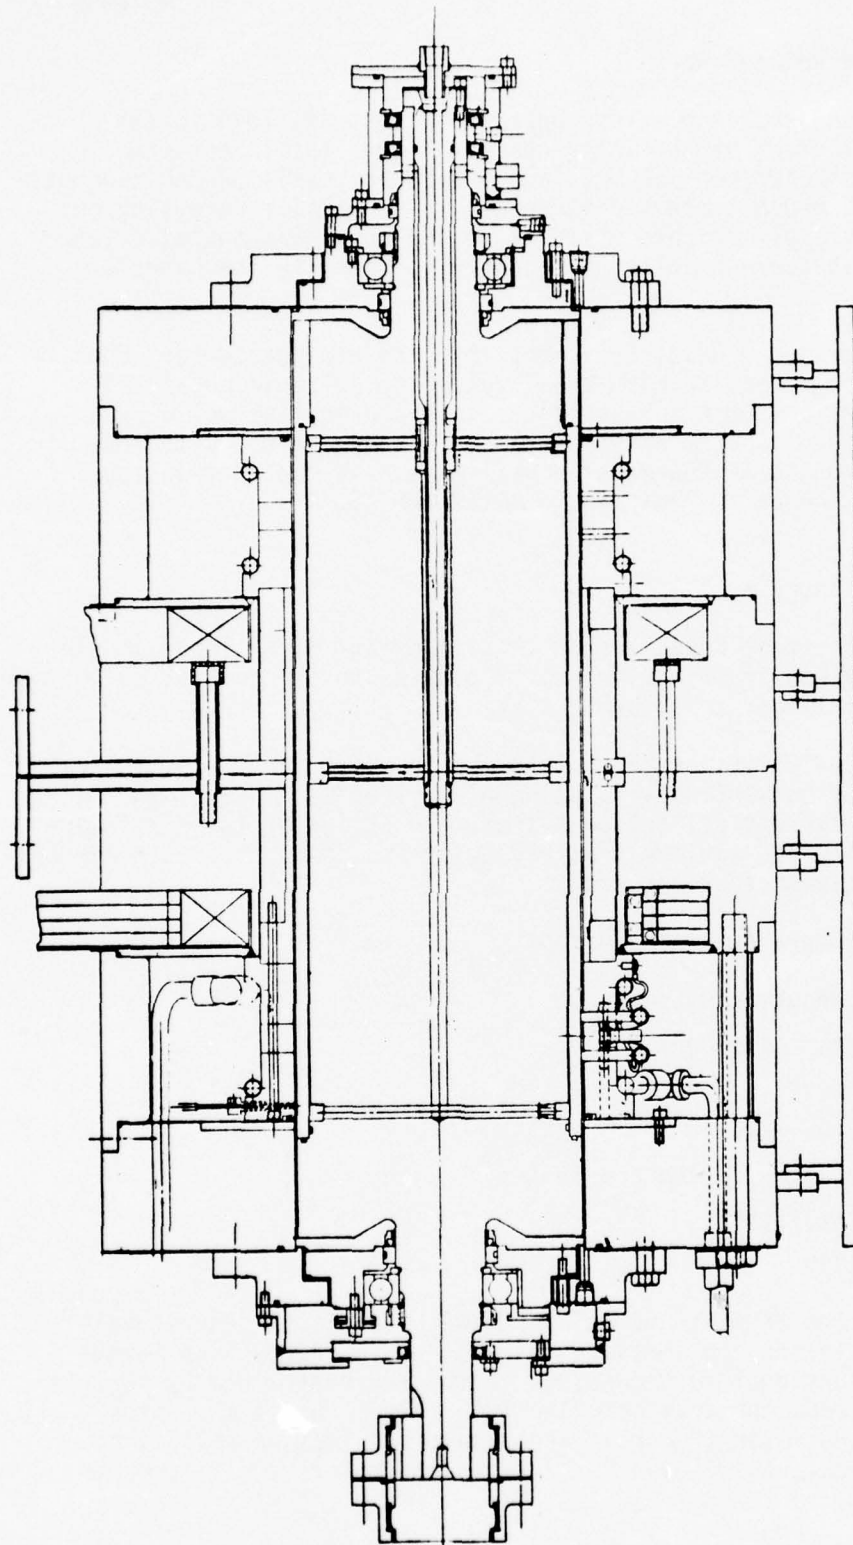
Machine-Environment Brush Tester (MEB)
